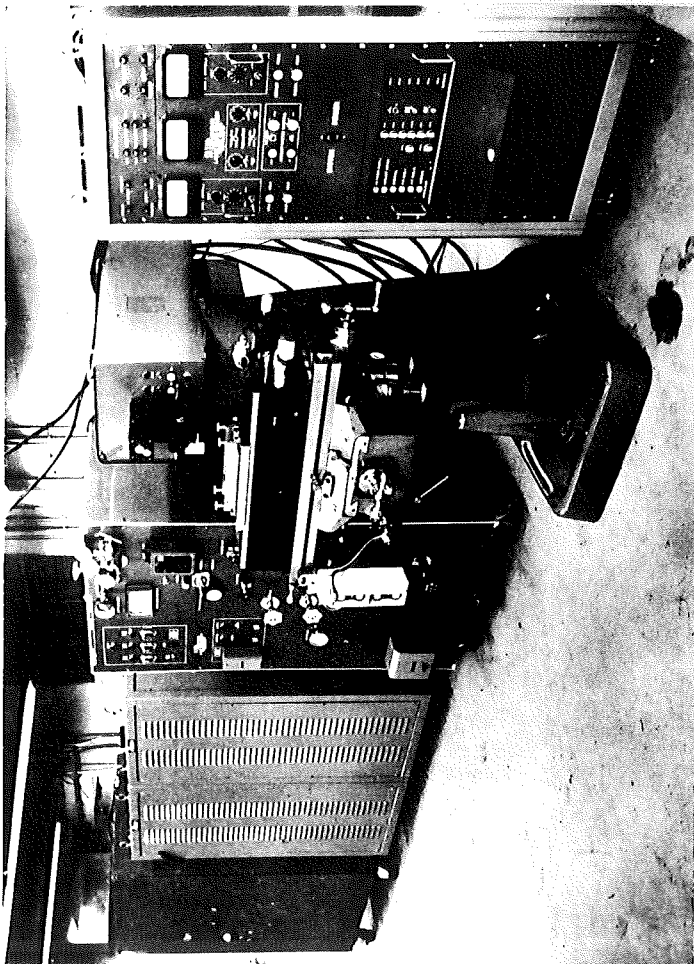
A high-power pulsed laser mounted on a milling machine base to study welding, hole punching, etc. Ventilated console second from left is a heat exchanger which removes wasted energy. Other consoles are for power supply and controls.
